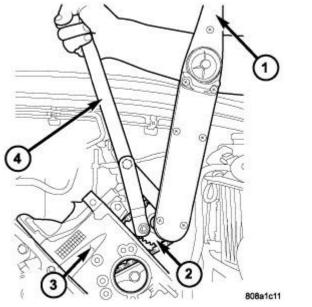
Tightening Left Side Cam Sprocket Retaining Bolt Courtesy of CHRYSLER LLC
